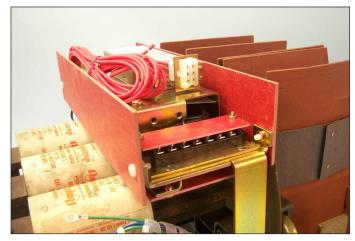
Front Aux. CT Module Insulation Barrier Installed on the Mounting Brackets.
